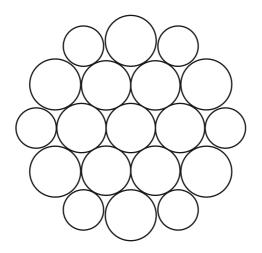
WARRINGTON CONSTRUCTION
